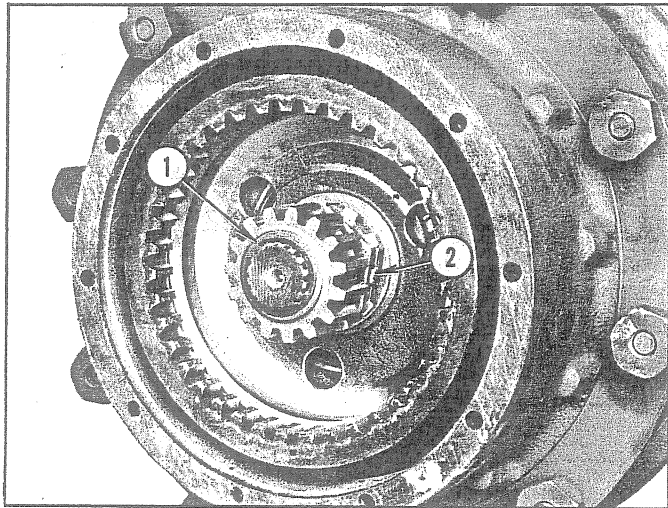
View Showing Sun Gear and Lock on Spindle Nuts
